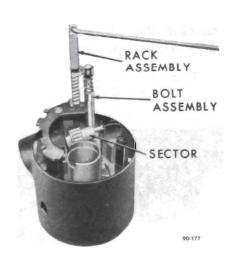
II4 Removing or Installing Rack and Lock Bolt
